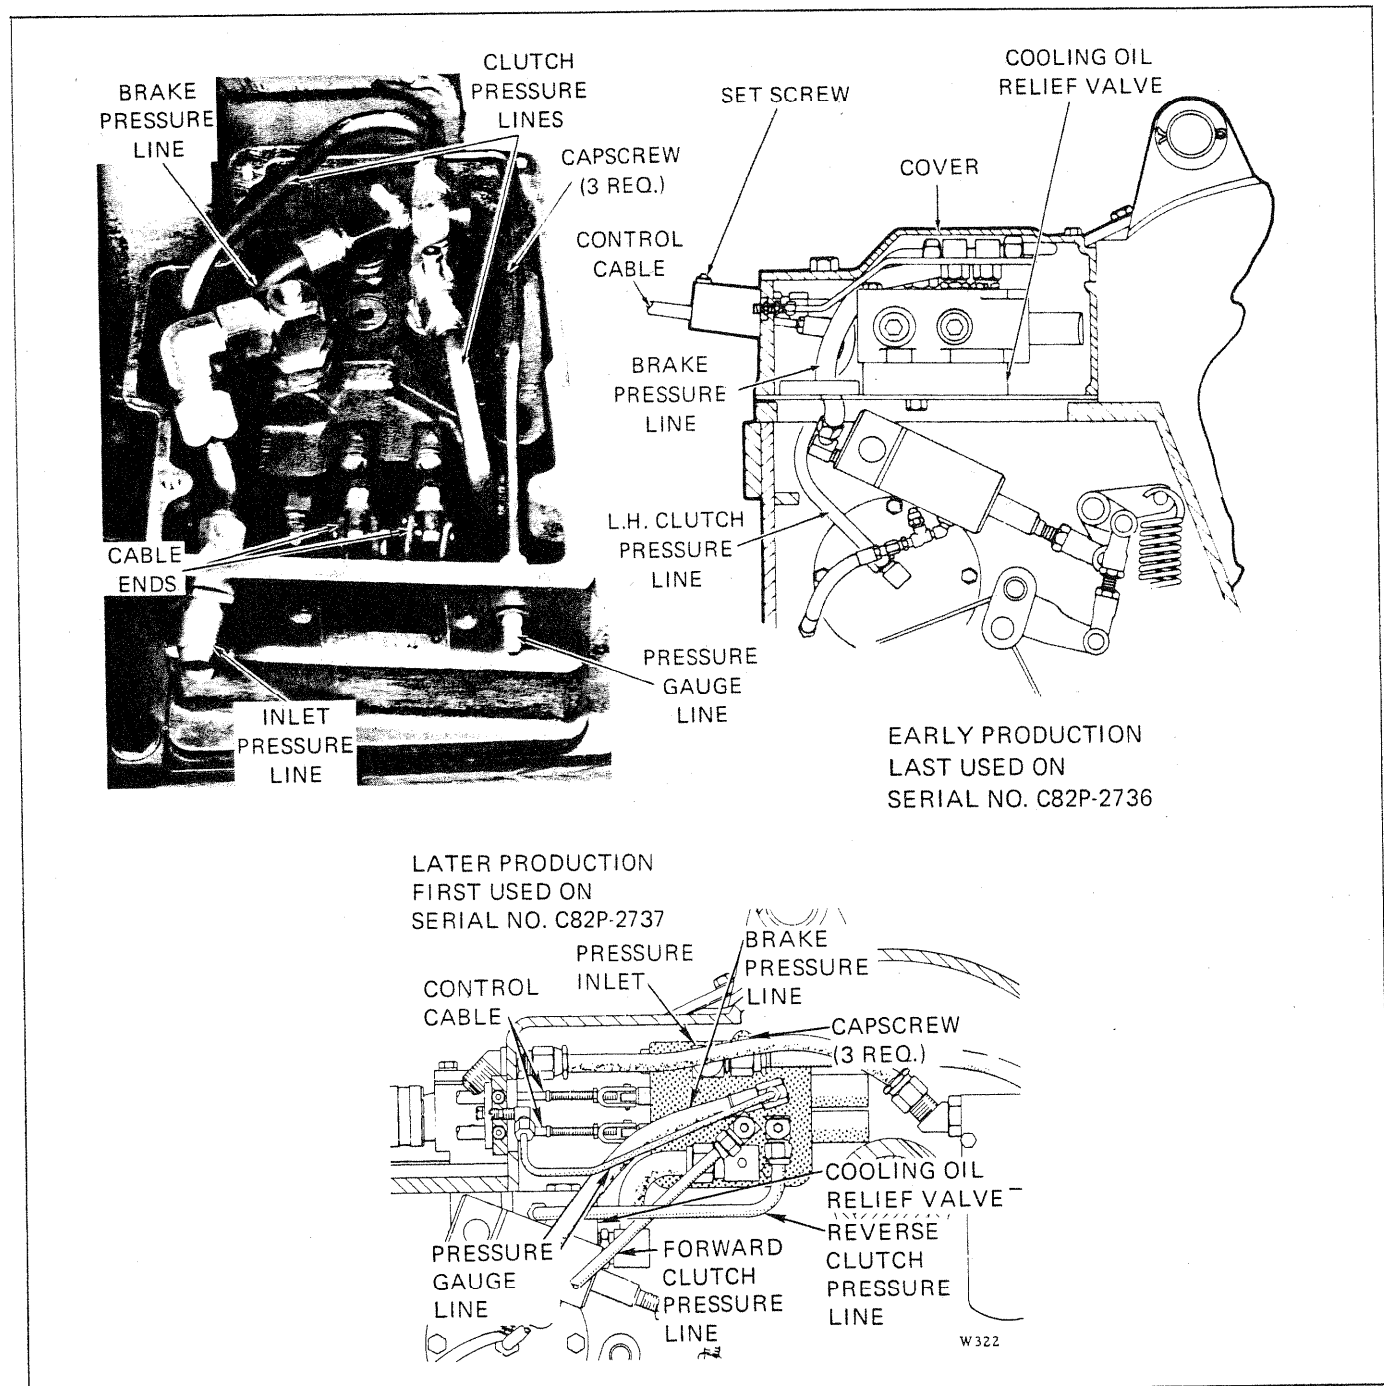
CONTROL VALVE REPAIR, POWER CONTROLLED WINCH (Sheet 1 of 2)
